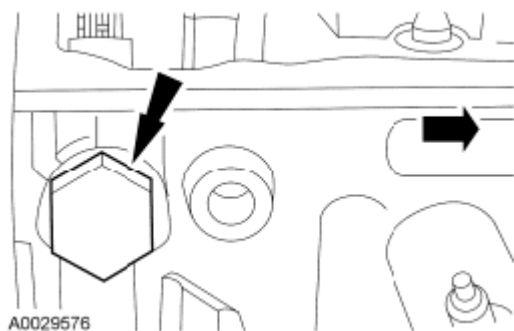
Locating RH Hydraulic Timing Chain Tensioner
